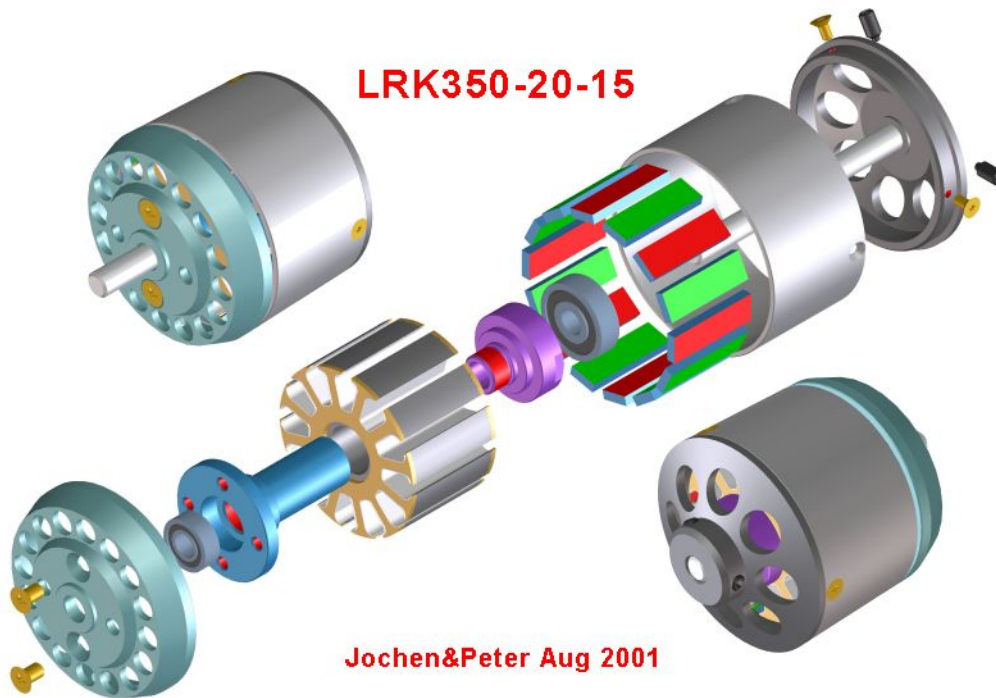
Exploded view of a 12 pole stator, 14 magnetic pole outrunner motor design identical in configuration to that found in the SunnySky 2814-8.⁷
